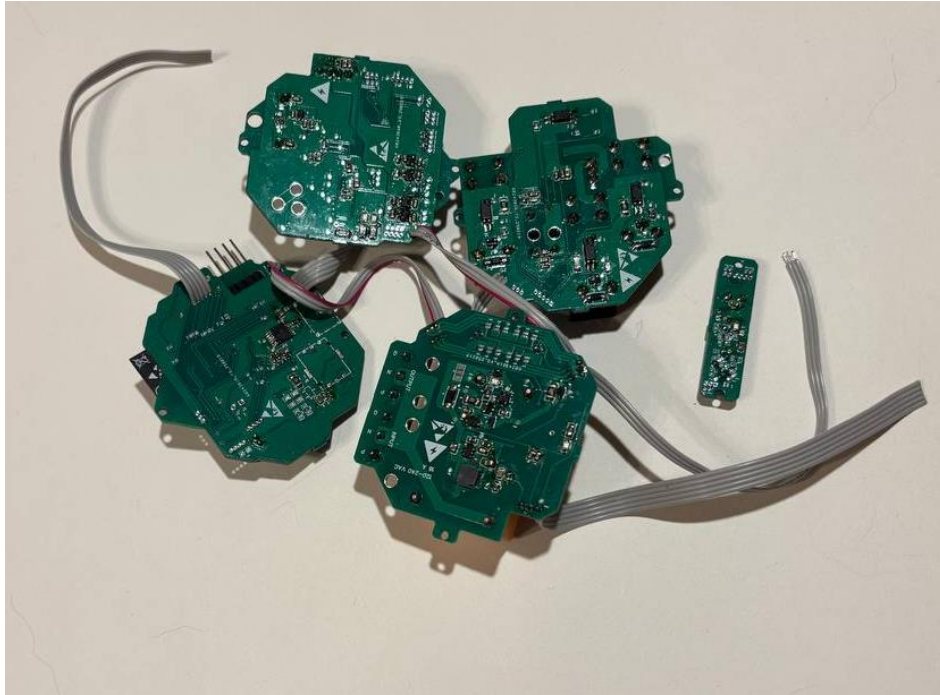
Image of a SEIS during the assembly process, before being assembled in single unit. Bottom side.
